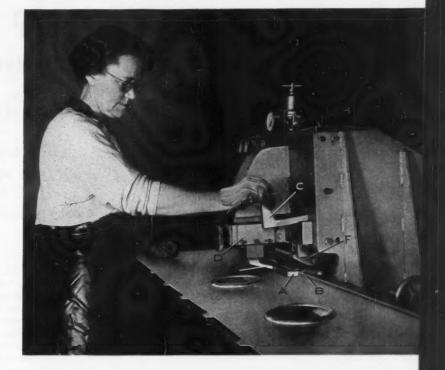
Another view of the Brady forming machine which shows the arrangement of the wiper tool during an operation.
